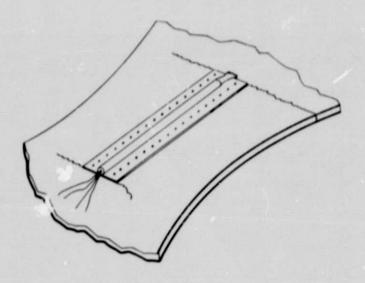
Fatigue cracks in specimen near ends of flange.
